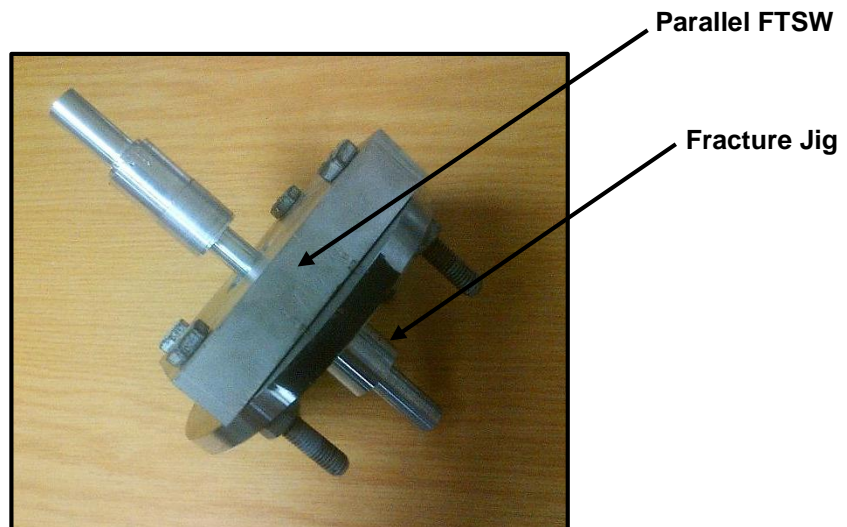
Fracture Jig for Parallel FTSW
